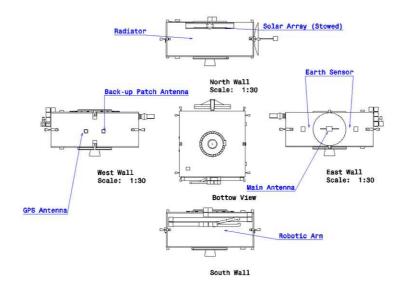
Side and bottom views of the DR LEO spacecraft (dimensions in mm).
